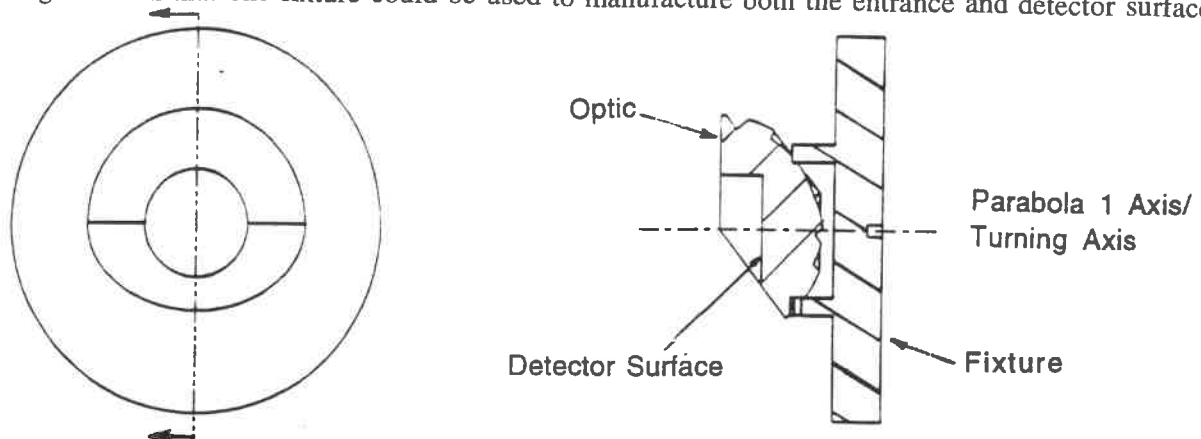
Substrate shown in fixture for machining the two optical flats on the back side of the substrate. The surface shown is the detector surface
